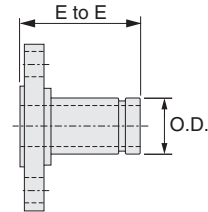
SS STAINLESS STEEL FLANGE ADAPTER
